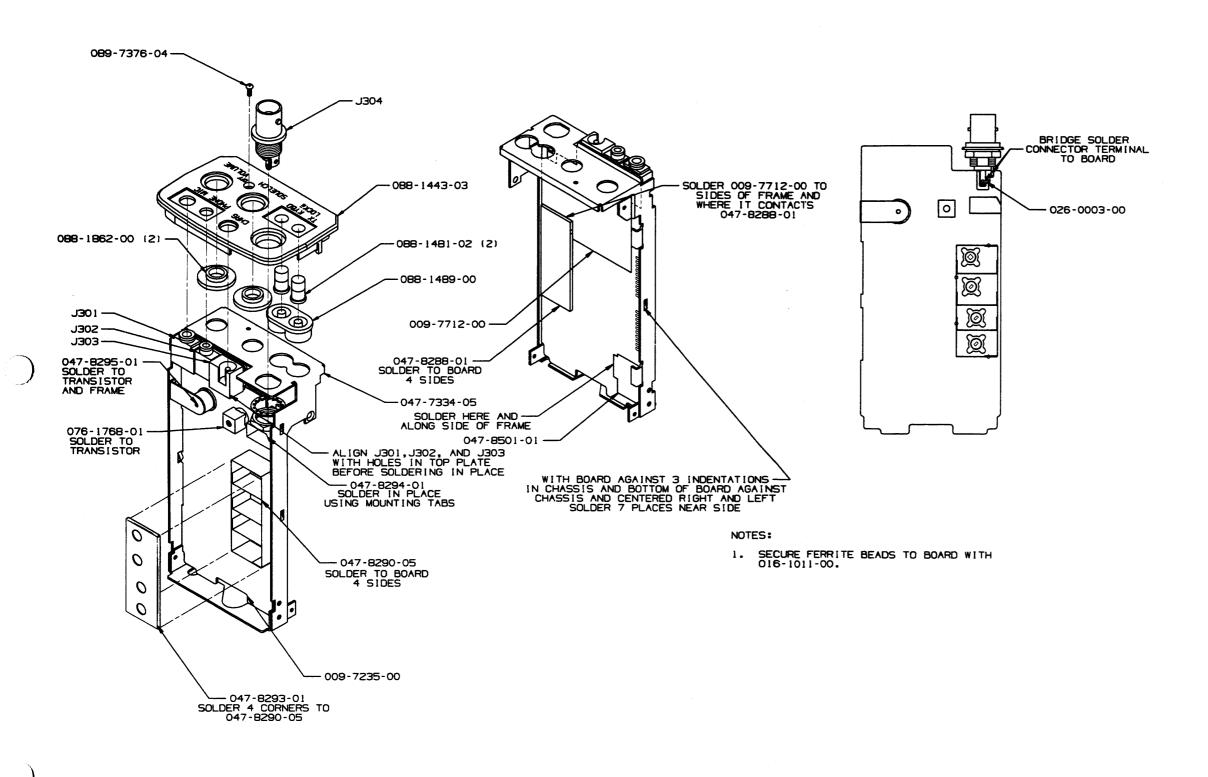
RECEIVER/TRANSMITTER BOARD ASSEMBLY (Dwg No 300-7235-00 R-3) (Sheet 2 of 2)
